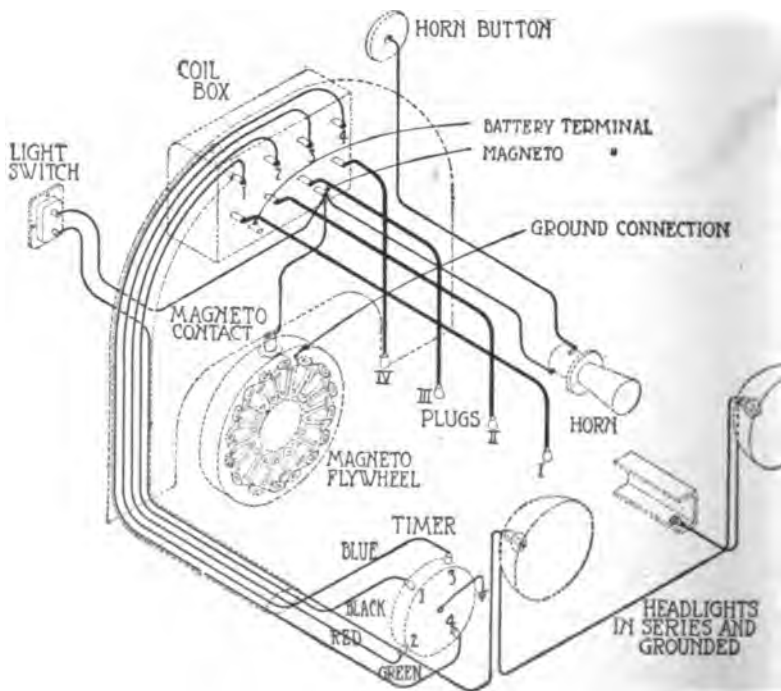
Perspective view of wiring and component parts of Ford standard electrical equipment
